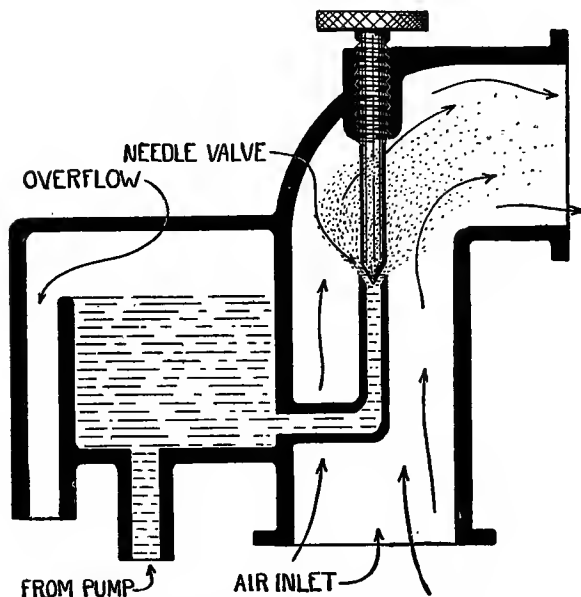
SPRAY NOZZLE VAPORIZER.
